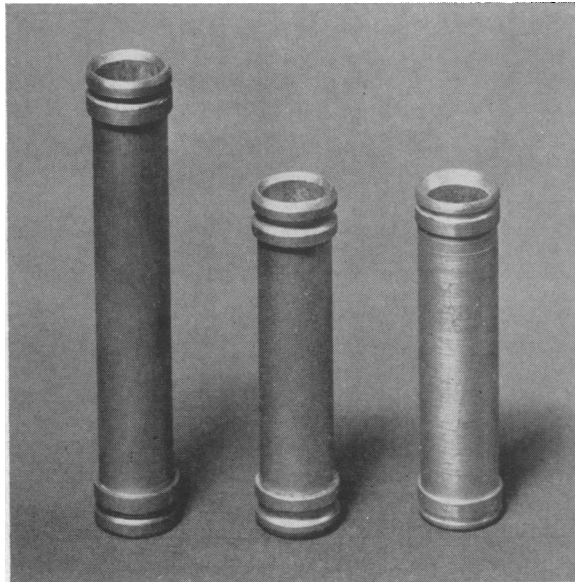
Typical magnesium and aluminum tubes used in these experiments. The stainless steel and copper tubes were of similar structure.
